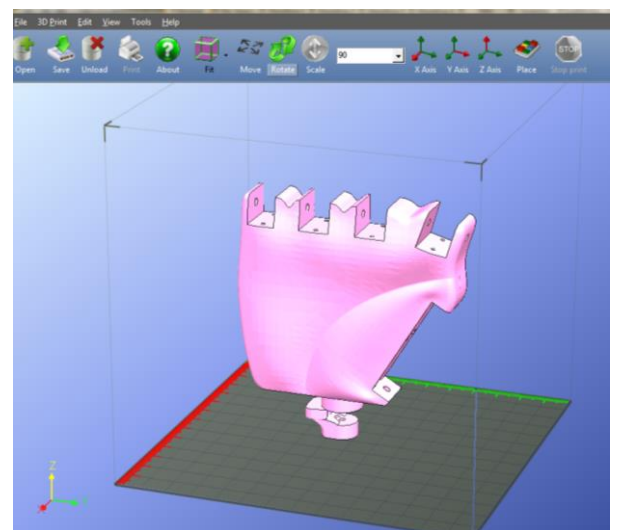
STL file of the palm model displayed in the printing environment
